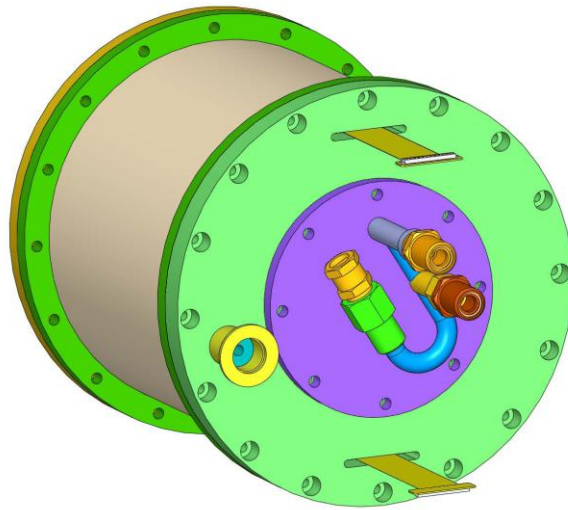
The compact vacuum valve is shown as the yellow colored plug in the left side of the back flange. The plug is shown in the light blue internal to the valve.
